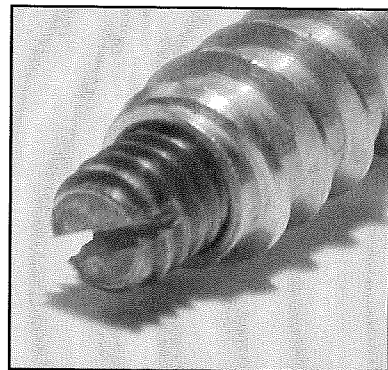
Slot cut across the tip of the threads for tightening with a screwdriver.
